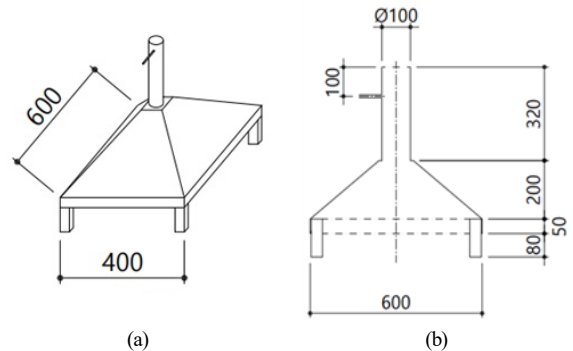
Shape and dimensions of collector: (a) isometric view, (b) front view (unit: mm).
